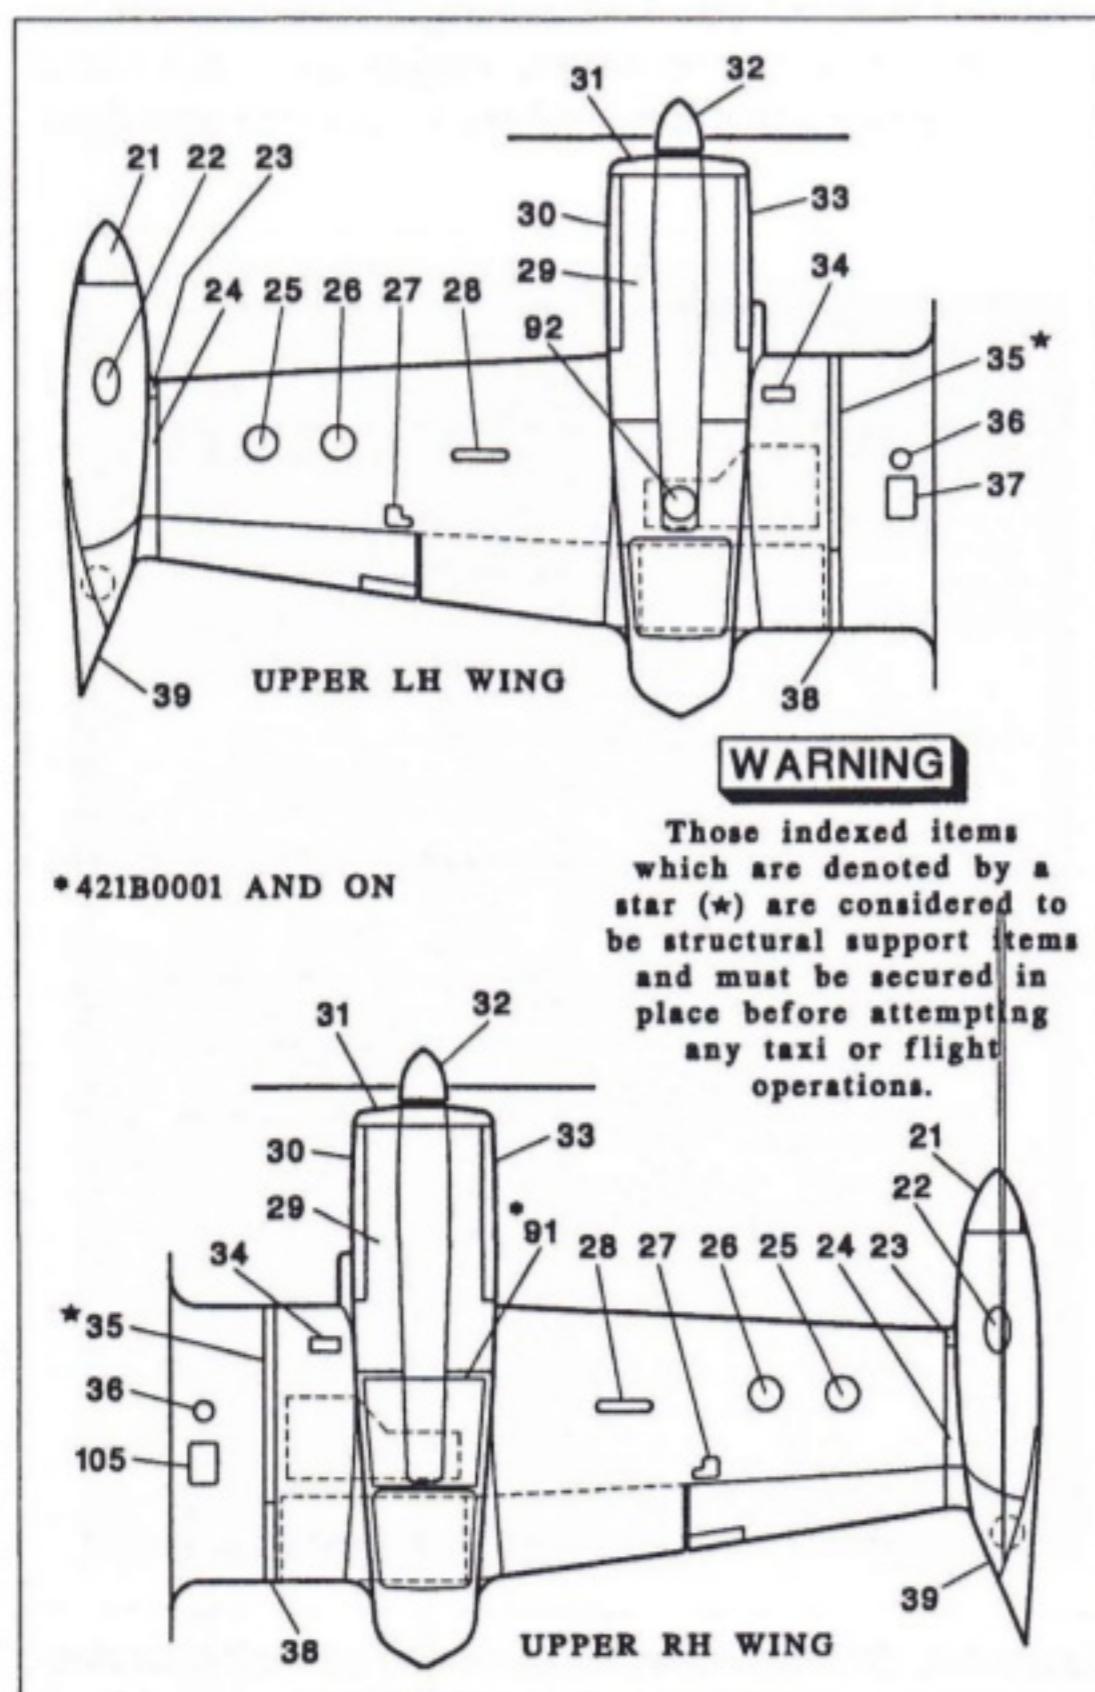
For locating inspection plates, refer to the service manual or ask an experienced technician.
